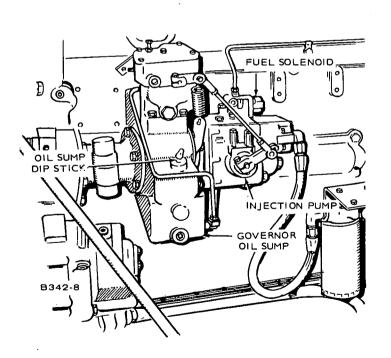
FUEL SOLENOID VALVE LOCATION
